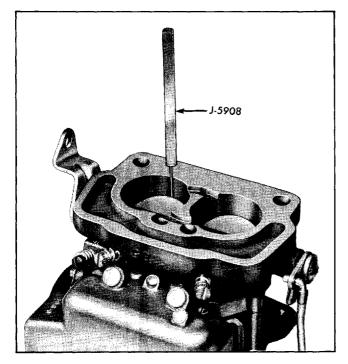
B-36 Fast Idle Adjustment (Carburetor Removed) Carter
